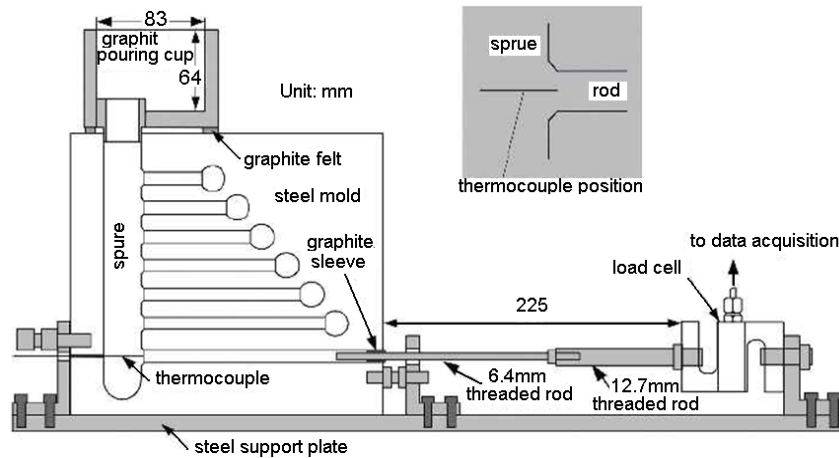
Steel mould for instrumented constrained rod casting designed to detect the onset of hot tearing [10].
